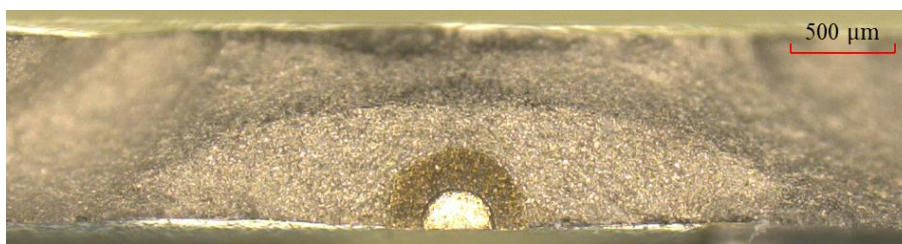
Fracture surface on the biaxial specimen D2 with surface crack (lower part).
